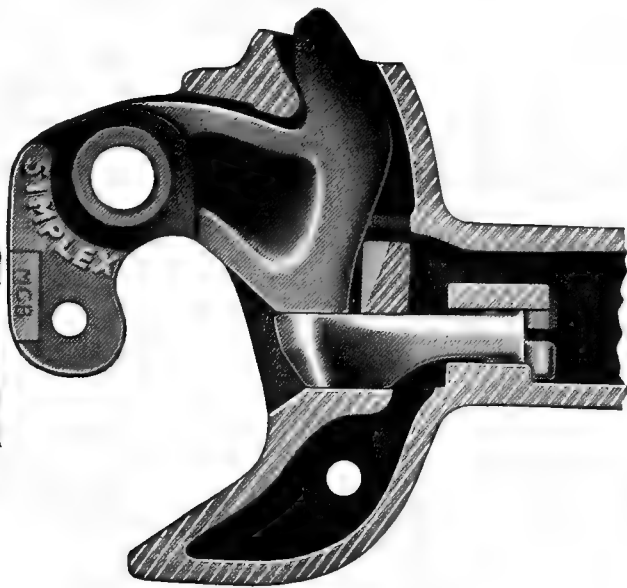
B—Horizontal Section Through Simplex Coupler When Closed.
